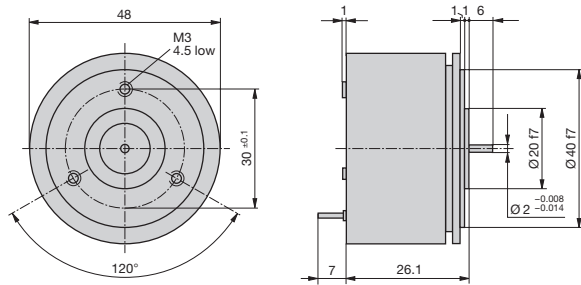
KINAX 3W2 with standard drive shaft at front only, \varnothing 2 mm, length 6 mm.
